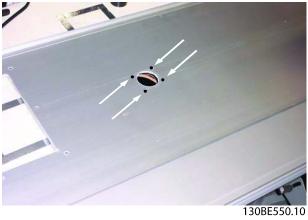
Shaft Hole with 4 Handle Mounting Holes
